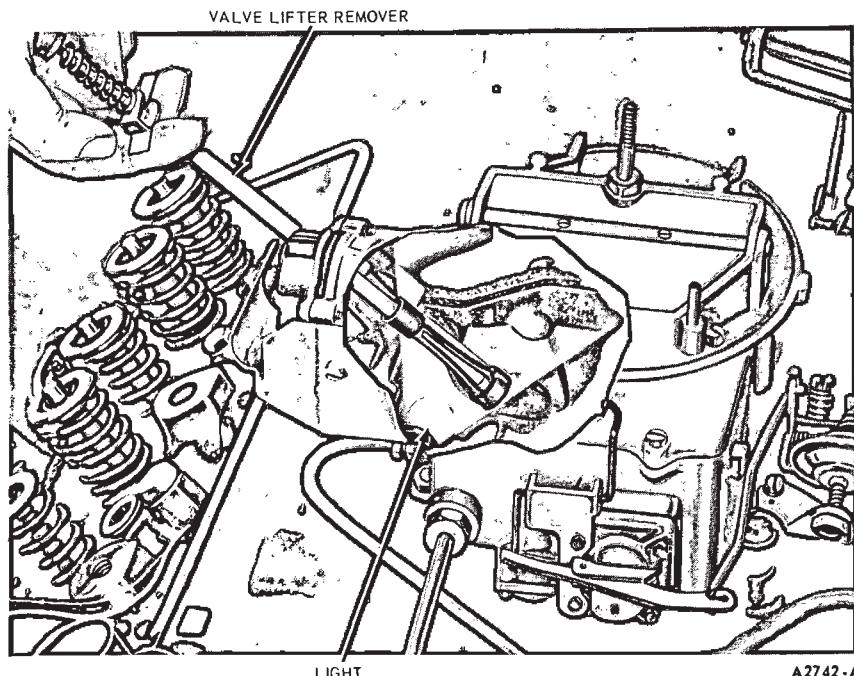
Removing or Installing Valve Lifter Intake Manifold Installed
